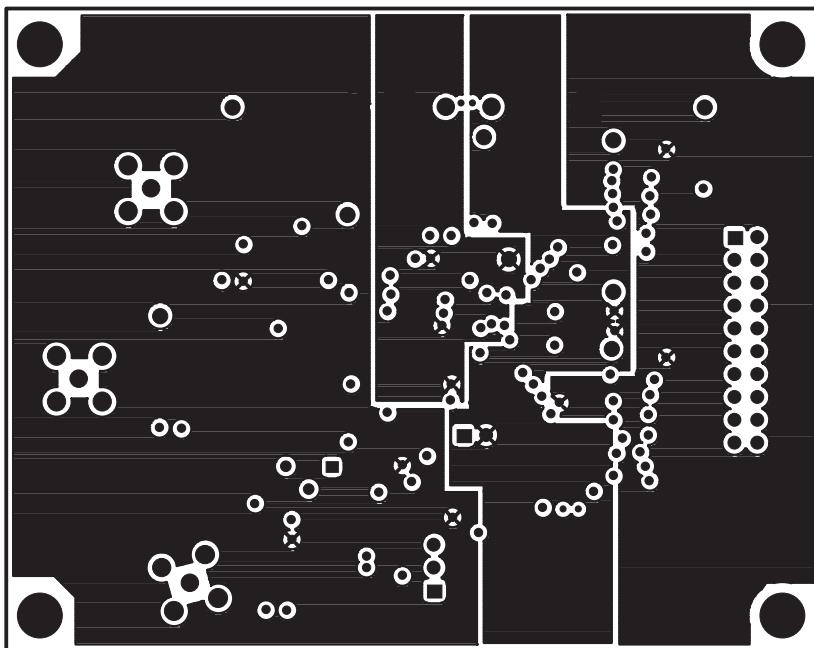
MAX1425 EV Kit PC Board Layout—Layer 3
